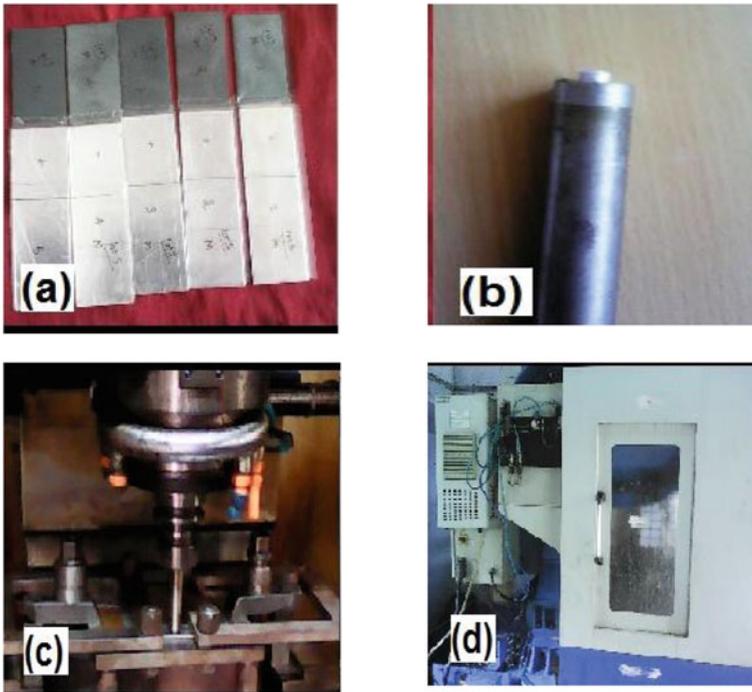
a Lap configuration of Al/SPCC plates, b FSSW tool, c FSSW process setup and d equipment used for FSSW experiments
